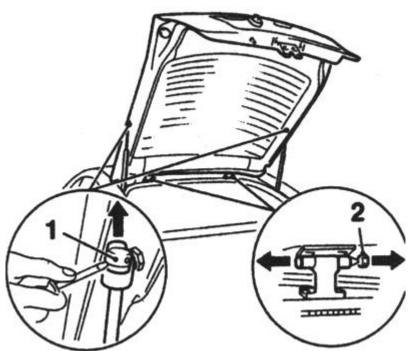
Mounting Doors back of: 1 - Lock clamp a gas-filled counters; 2 - retainer axis of the hinge
